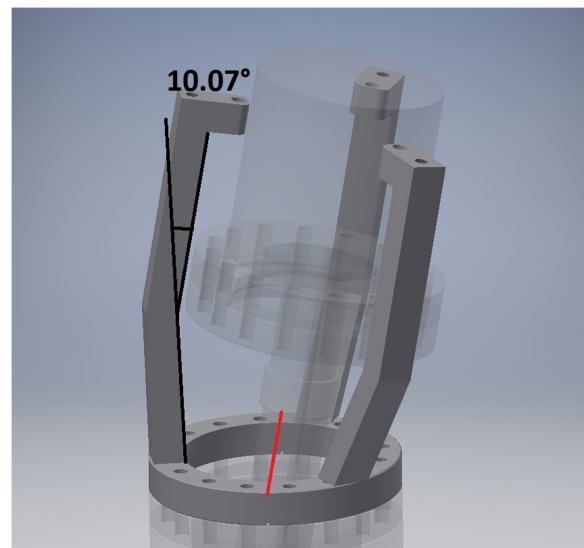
The final stainless steel support system design. The three arms are welded to the flange at the base. The flange is cut in half as delineated by the red line to enable the assembly to occur around the optical components. The angle required to obtain the limiter view is noted.
